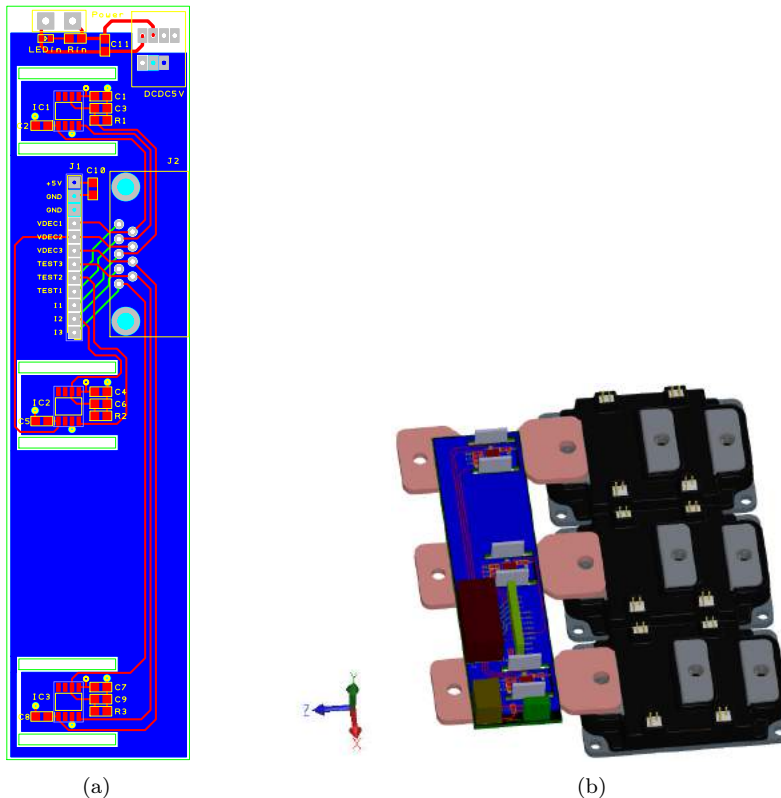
(a) Layout of the current measurement PCB having the MLX91208-CAV sensors and (b) 3-D CAD drawing of the sensor board mounted on the inverter ac terminals
